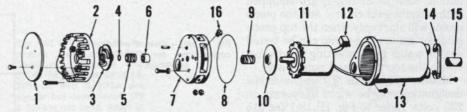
Exploded view of LSP2 series submersible pumps.
